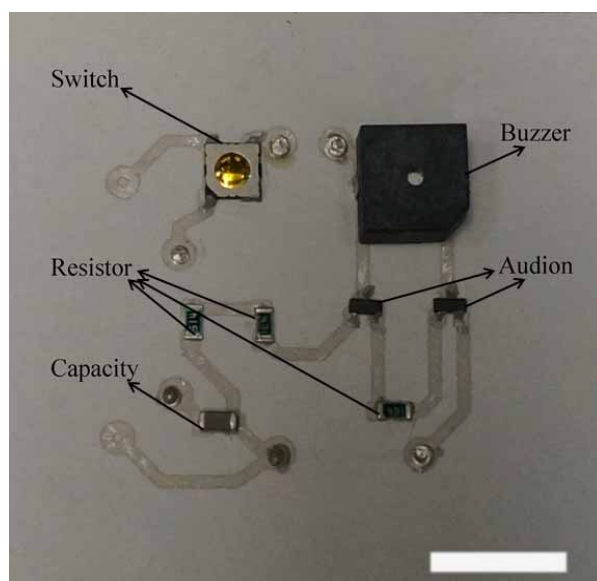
A prototype of doorbell assembled on a three-layered P-PCB. The scale bar is 10mm.
